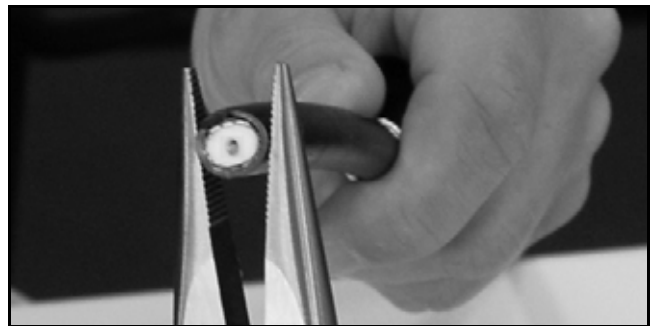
Placing the Heat Shrink Tubing and Ferrule
